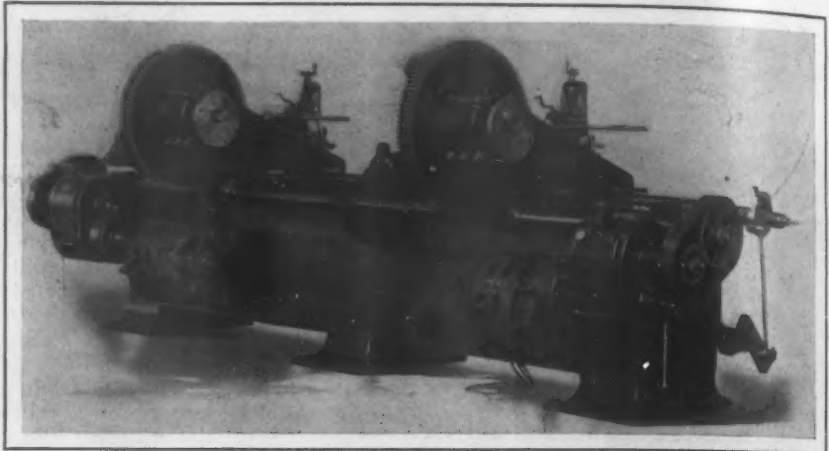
Rear View of the Machine Showing the Westinghouse Constant-Speed Motor Drive
